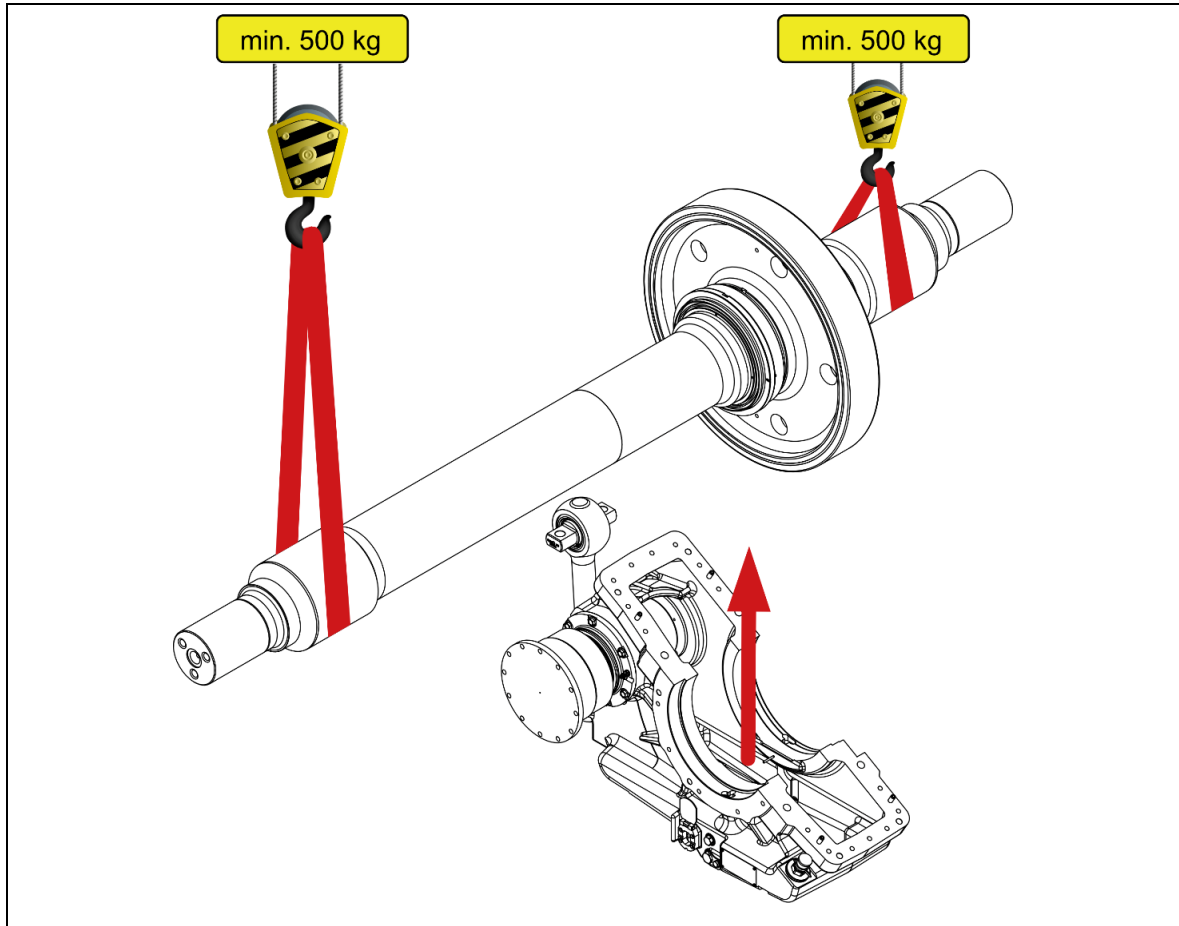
Removing the wheelset shaft from the Traction Gearbox
